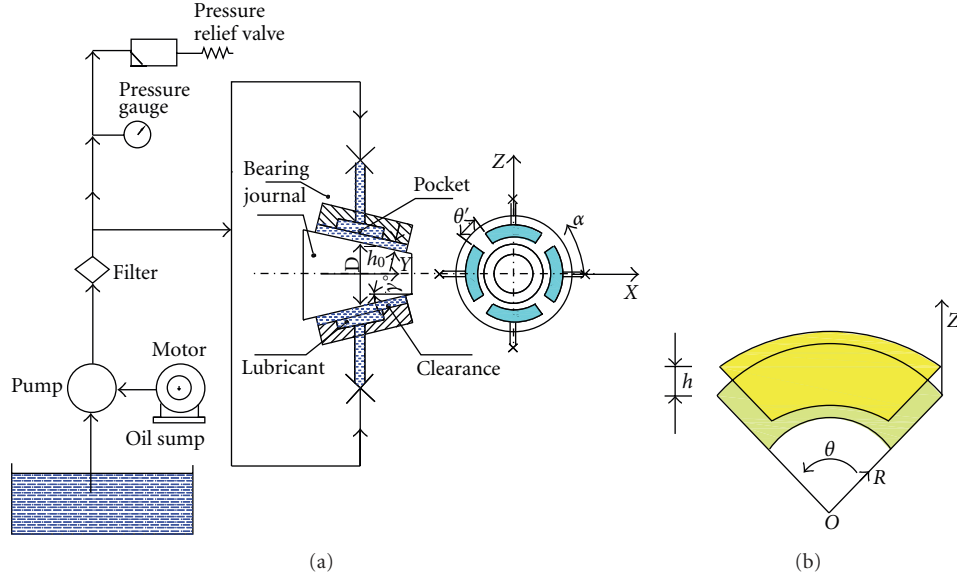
(a) Schematic of conical journal bearing system. (b) Developed surfaces of conical journal bearing system in cylindrical coordinates.
